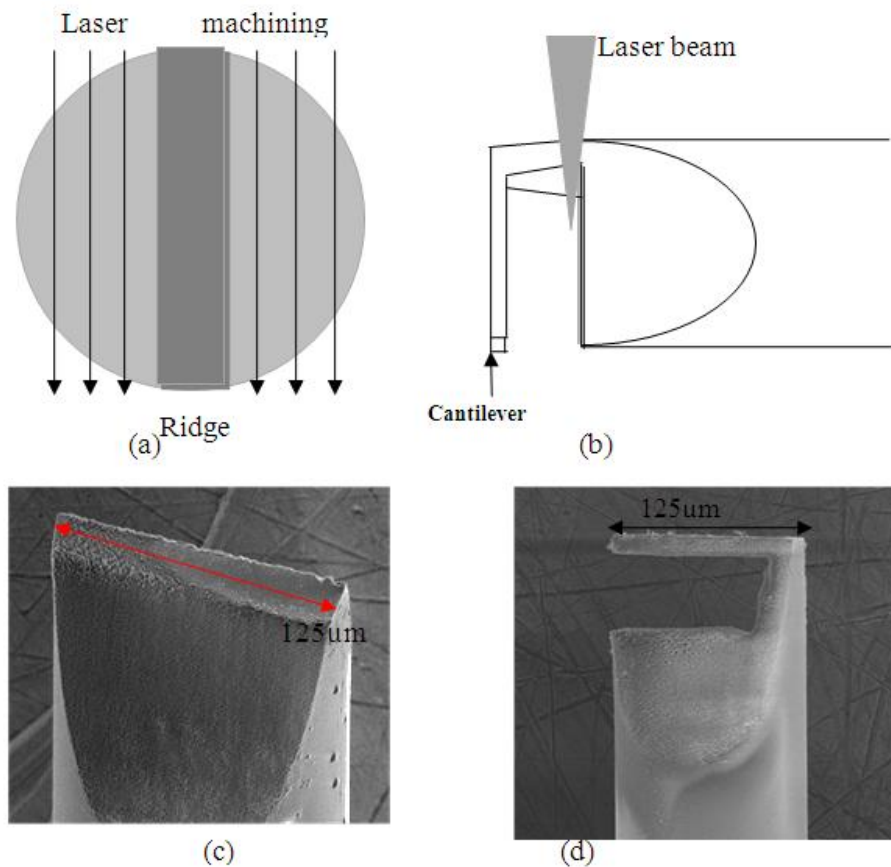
Outline laser machining process to form fibre tip cantilever, (a) ps-laser machines a ridge onto cleaved fibre (top view), (b) ps-laser under-cuts to form free standing cantilever (side view), (c) SEM view of machined ridge, (d) SEM view of ps-laser machined cantilever.
